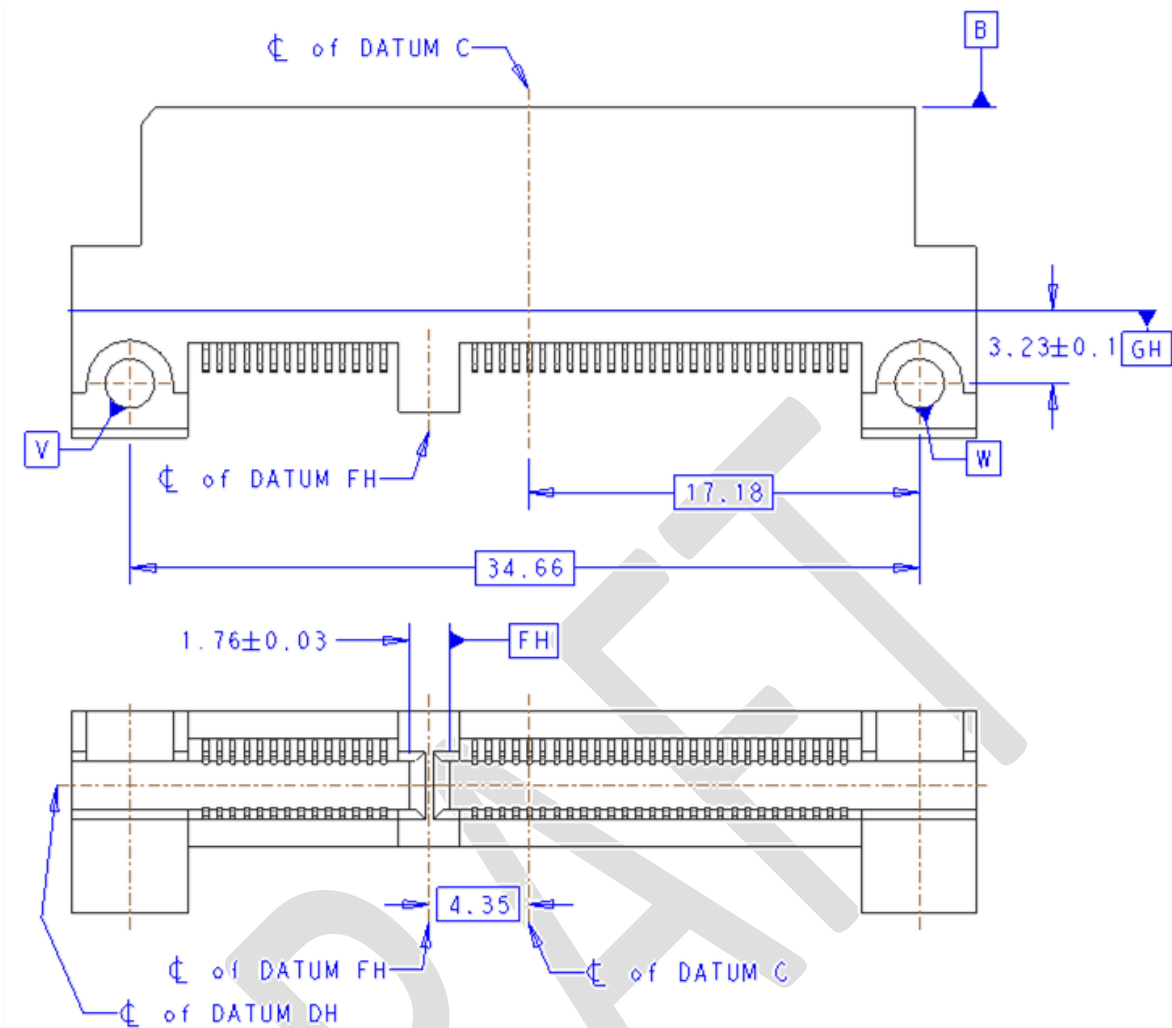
2C STRADDLE MOUNT CONNECTOR DIMENSIONS – REAR VIEW (MM)
